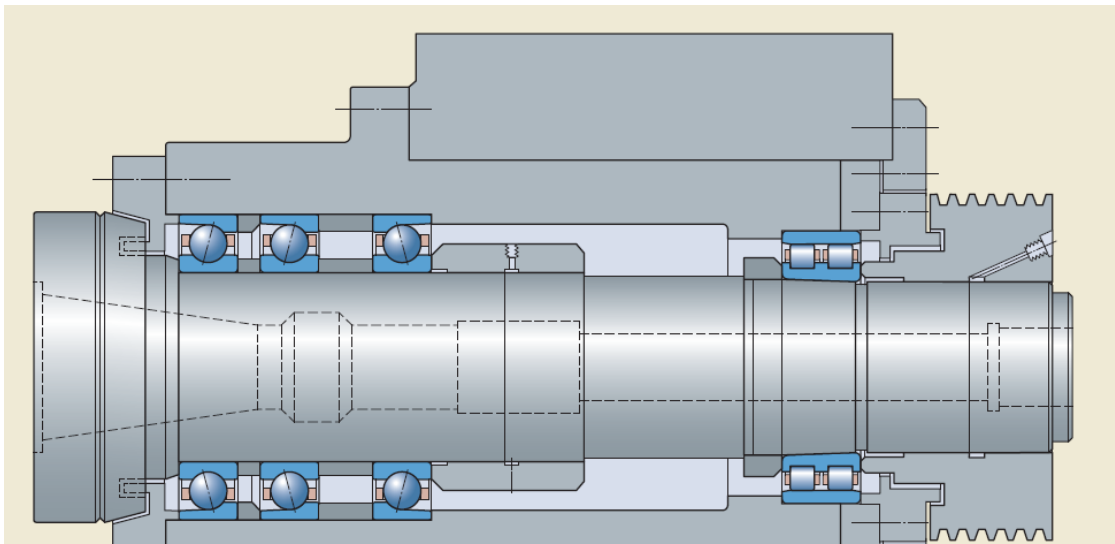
Belt driven spindle of CNC lathe (SKF, 2014, p. 58)
